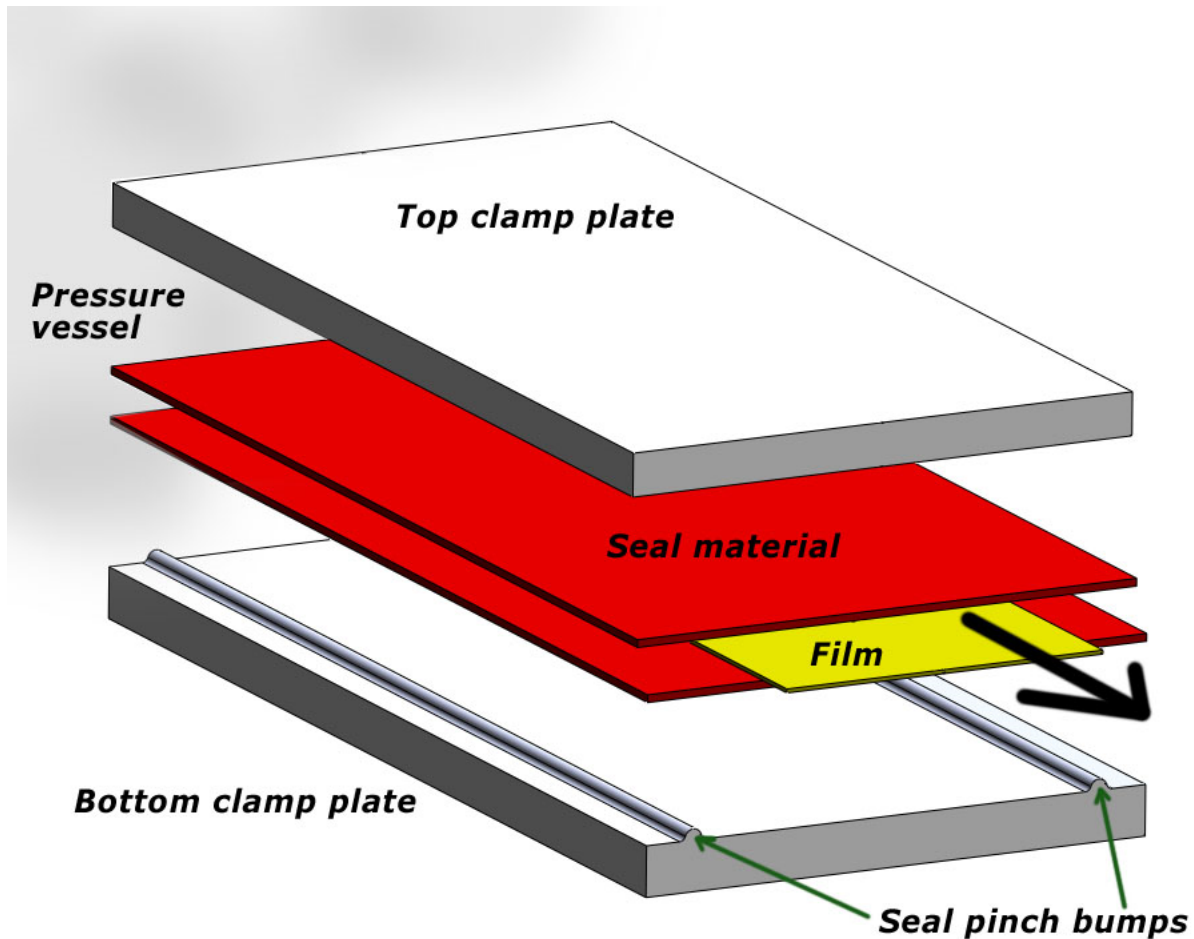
Exploded view of a closed-cell seal material implementation. The bumps on the clamping plates are sufficient in shutting off the transverse flow.
